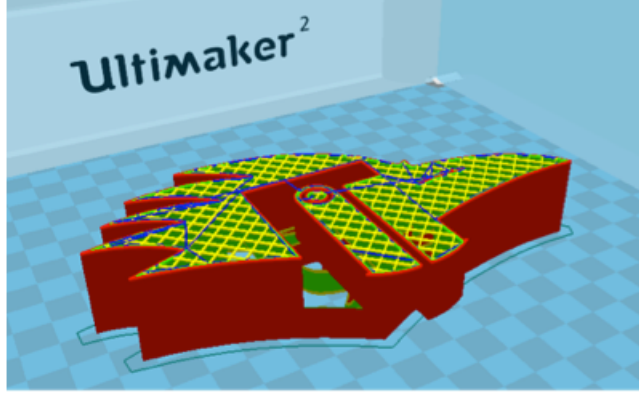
The CAD Drawing Is Pre-processed Before It Is 3D Printed Using Cura, A Slicing Software
